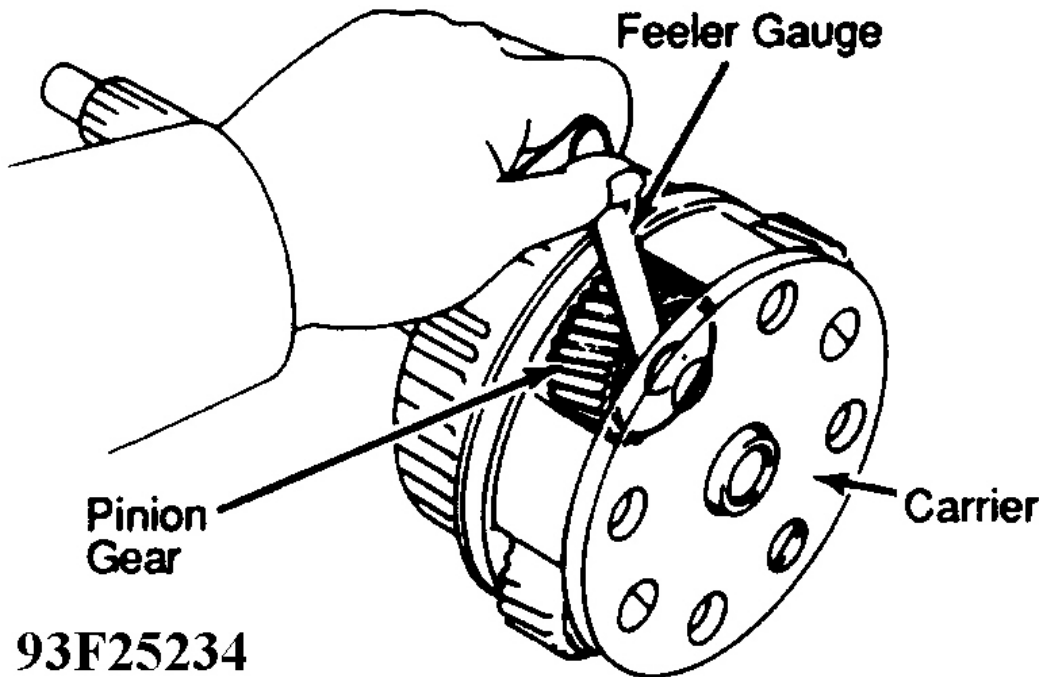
Measuring Planetary Pinion Thrust Clearance
